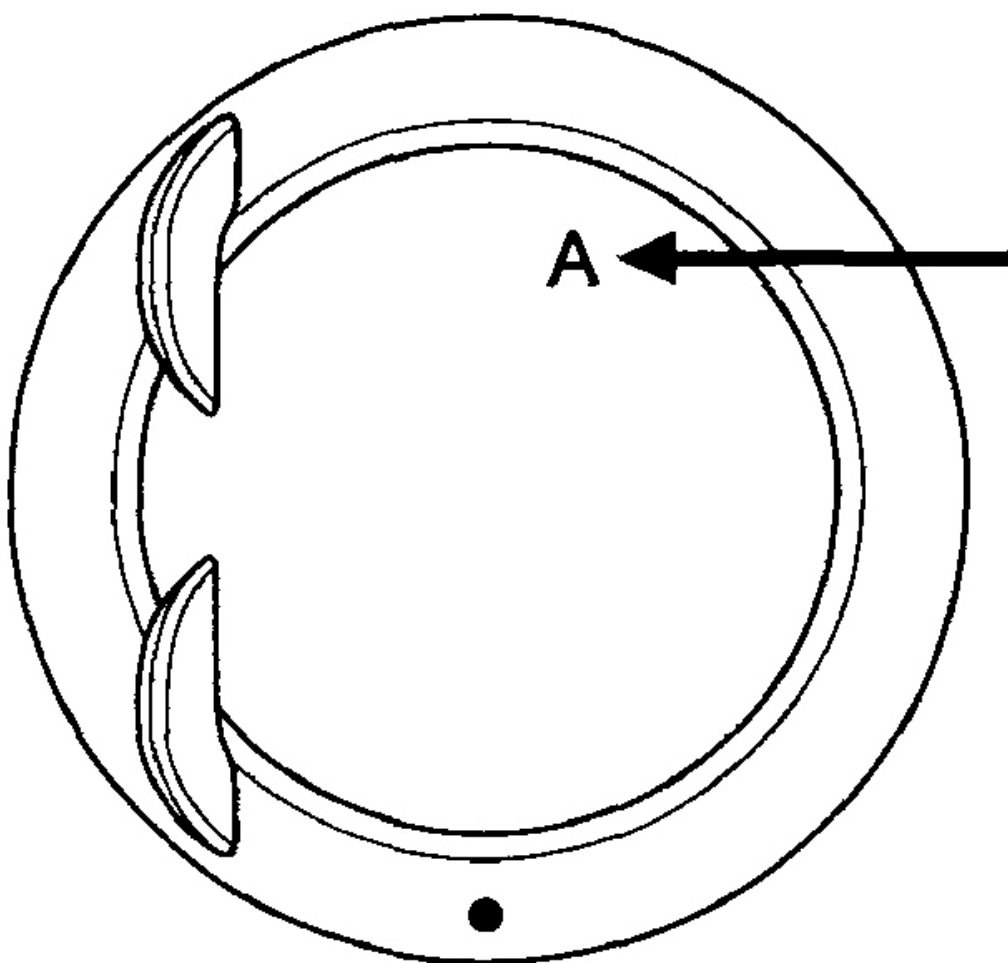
Checking Cylinder Bore Size Code On The Cylinder Block Bottom Face
